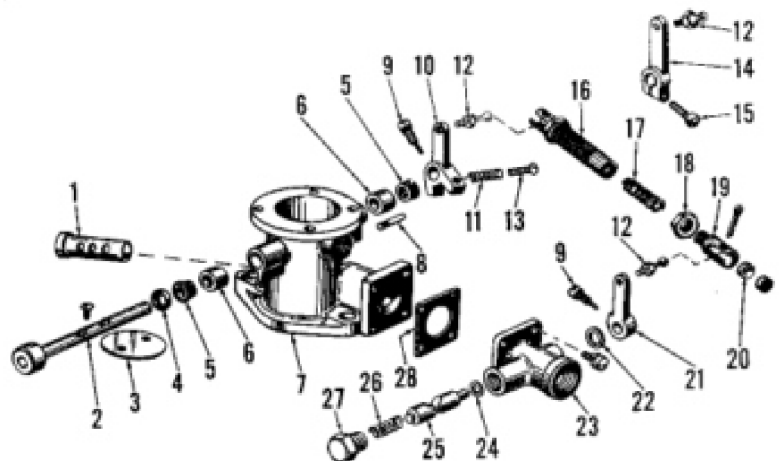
Exploded view of Century LP-Gas carburetor assembly. View is with unit turned upside down, and with air horn removed. Refer to Fig. 108 for fully exploded view of drag link assembly.
